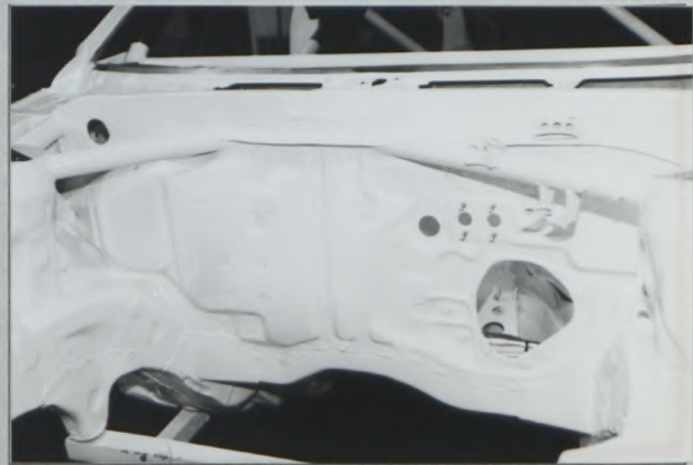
(REAR SUPPORT TO TURRET)
